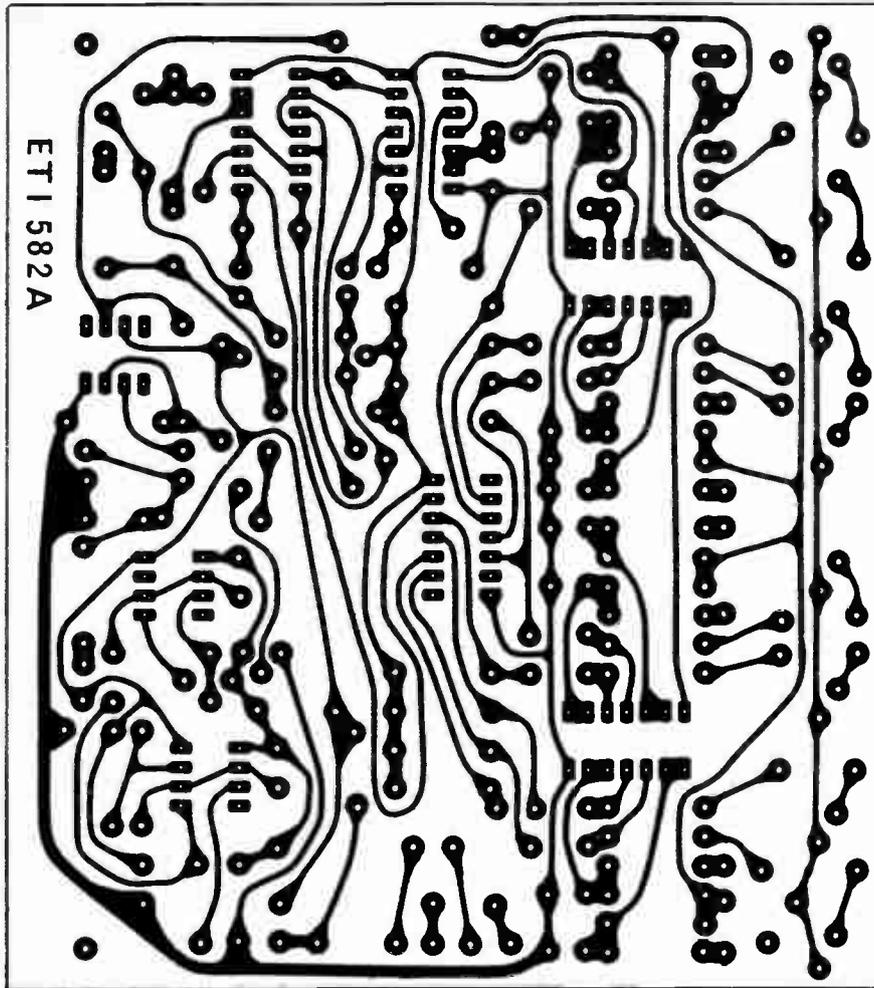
PC board layout of board 'A'. Full size 130 x 115 mm.
